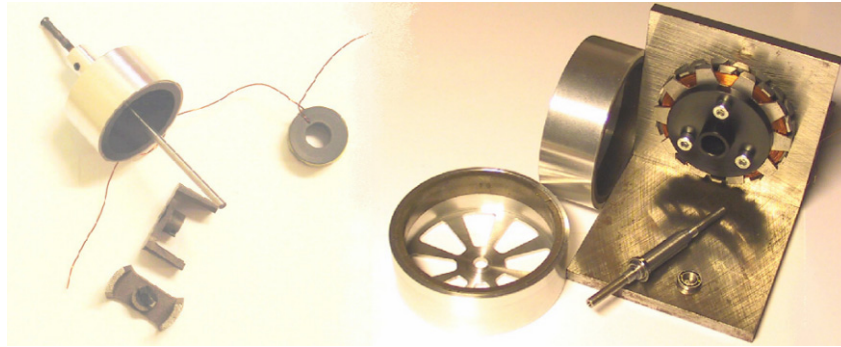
Prototype claw-pole motors: single-phase (left) and two-phase motor (right) [4].
